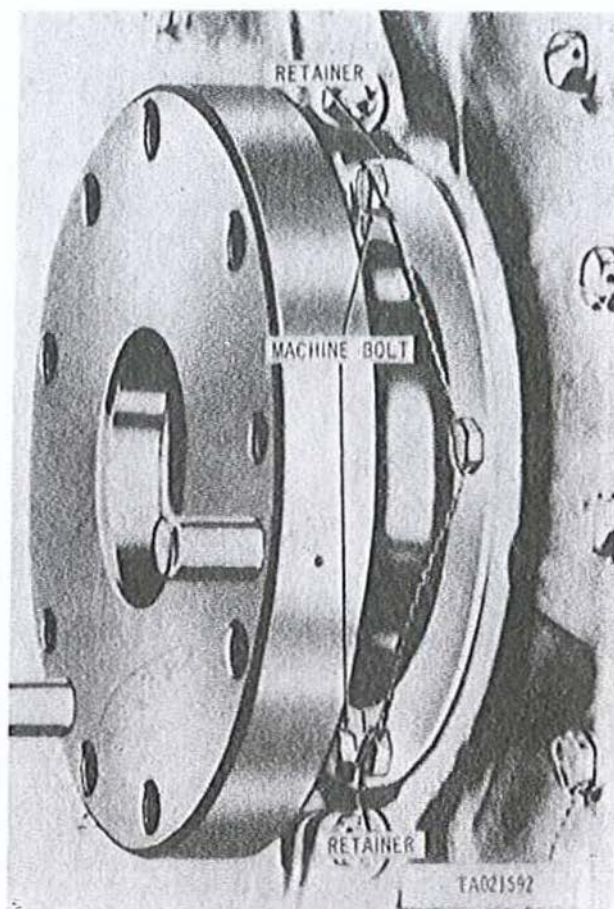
Removing or installing crankshaft oil seal retainers.
